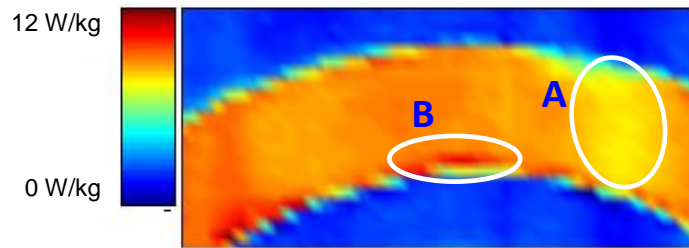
Detection of damaged zone: A defects in the magnetic structure and B losses due to machining
